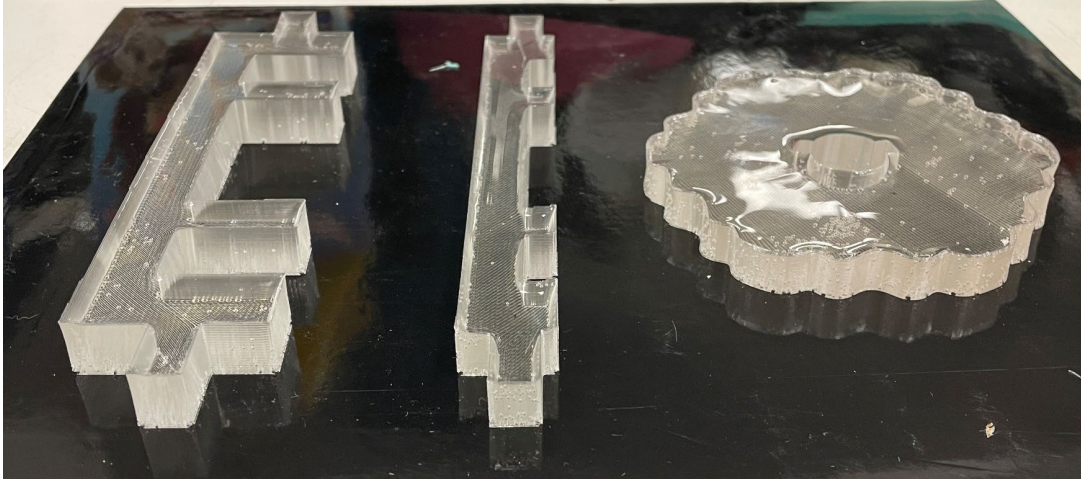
Full size DHAM parts fabricated using neat epoxy. From left to right: stator long leg assembly, stator short leg assembly, and rotor assembly.
